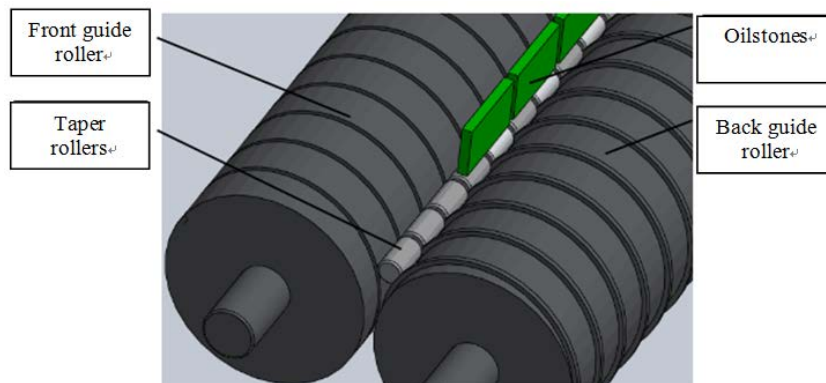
Machining method sketch map of through-feed superfinishing of taper rollers
